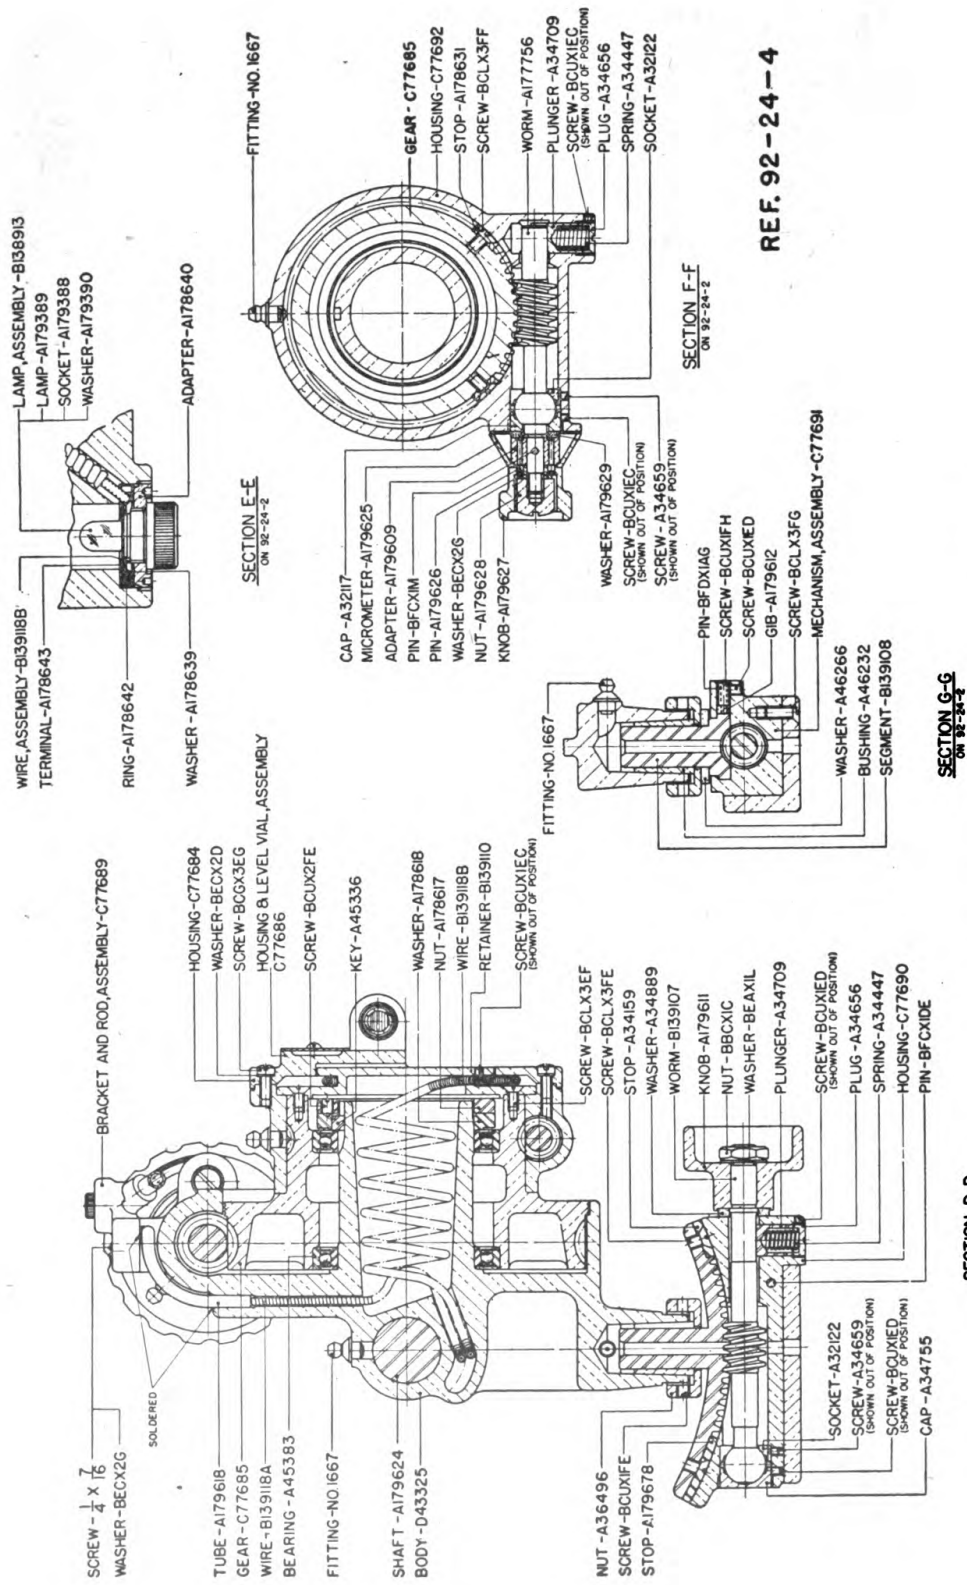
Range quadrant M4, sectional views D-D to G-G.
